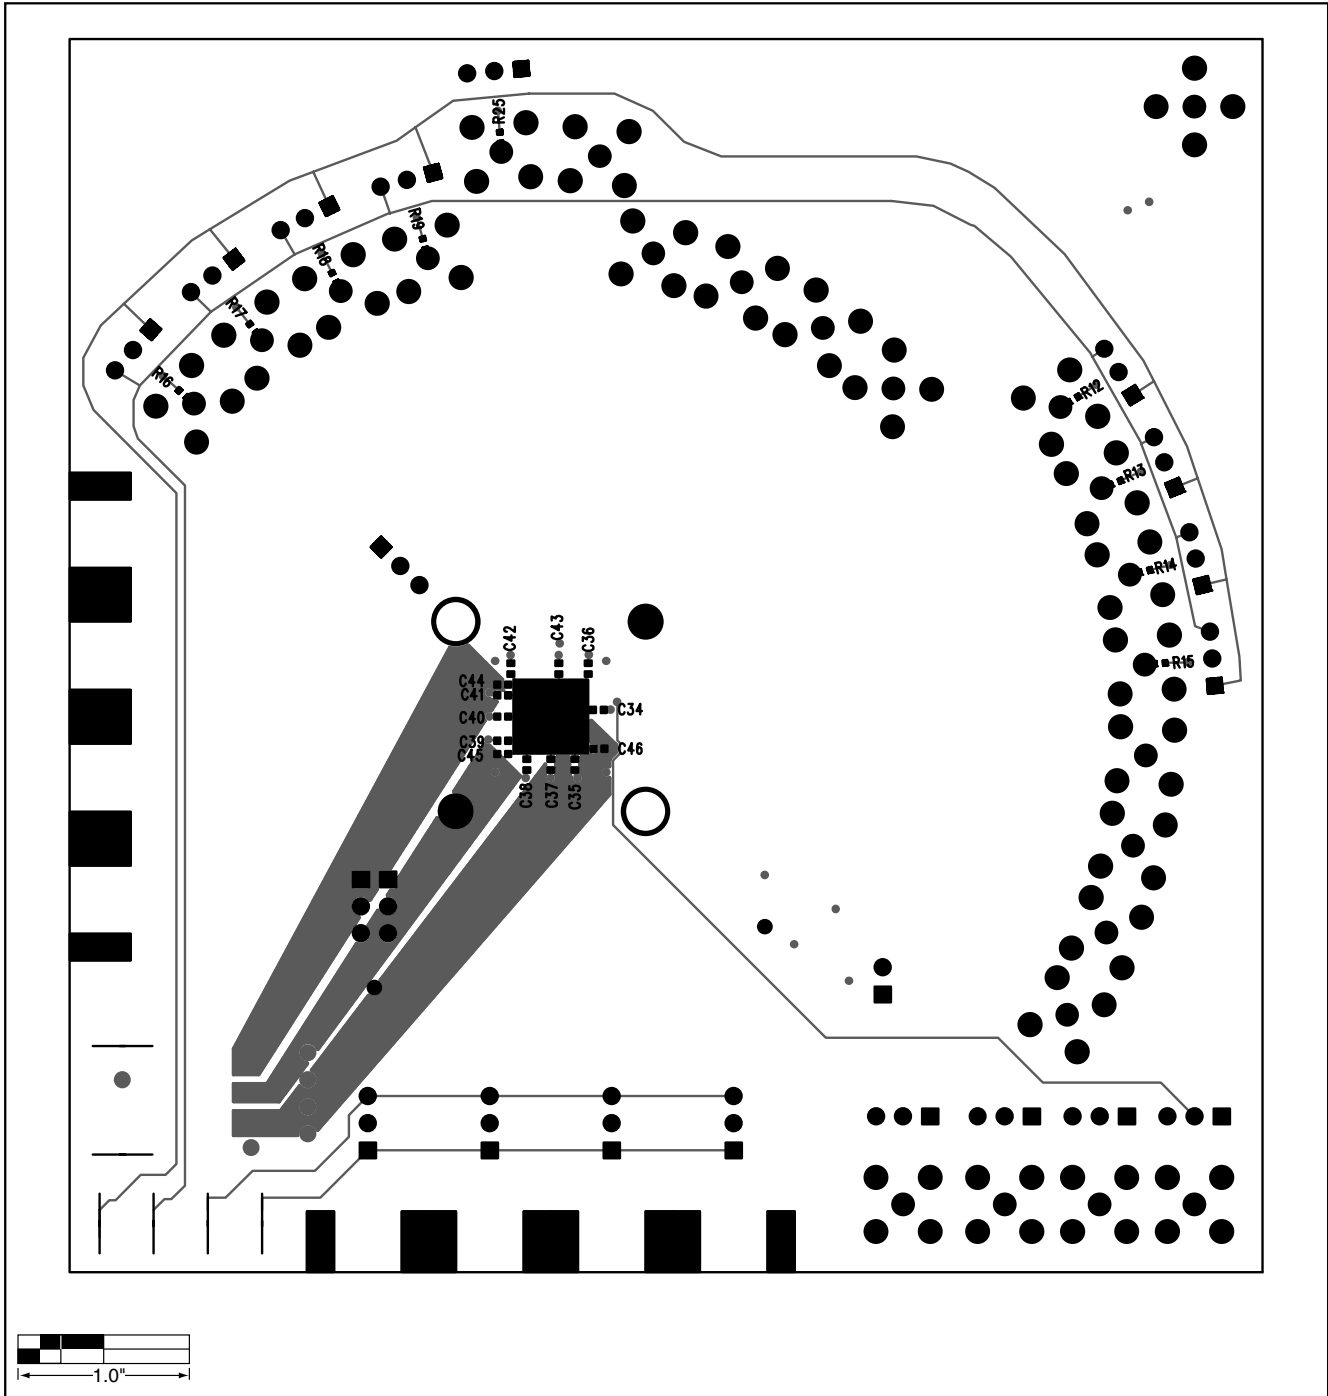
MAX3782 EV Kit Component Placement Guide—Solder Side
